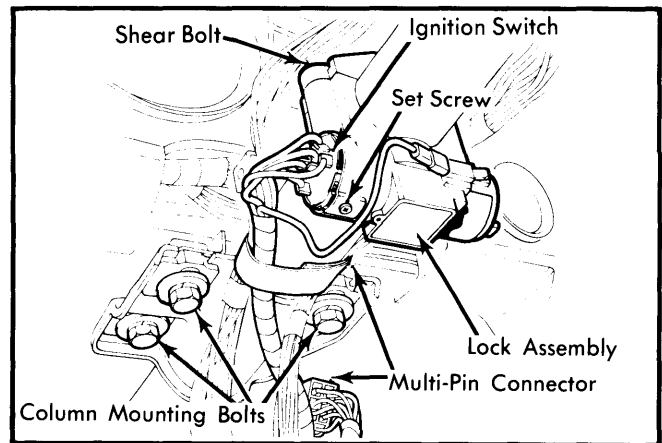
Bottom View of Steering Column Showing Ignition Switch and Column Lock
